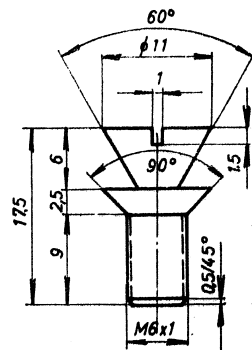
SLIDES FIXING SCREW — IN THE MANTLE
